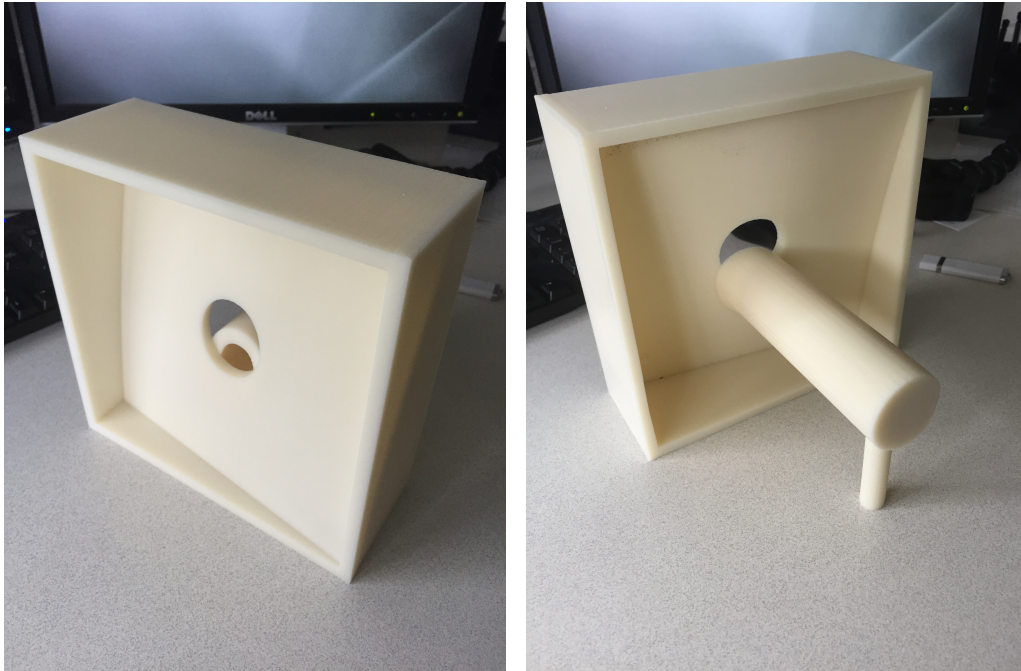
3-D Printed Pipe Geometry and Failed Connection
